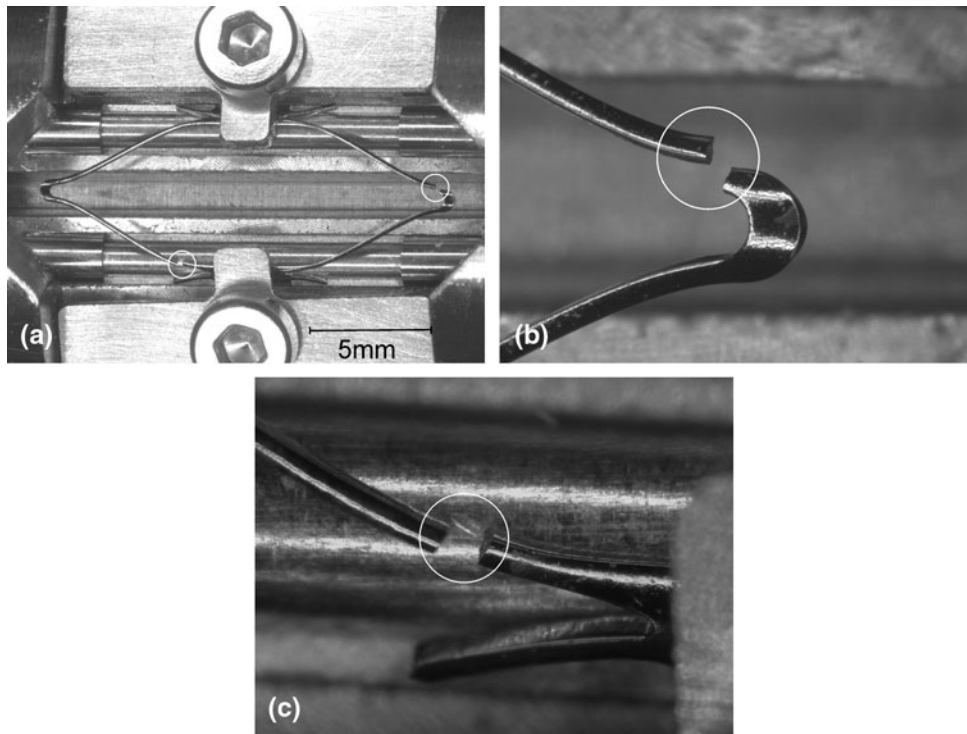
Diamond test specimen with fractures (see circles) at the specimen apex (top right) and nearby clamping (bottom)
